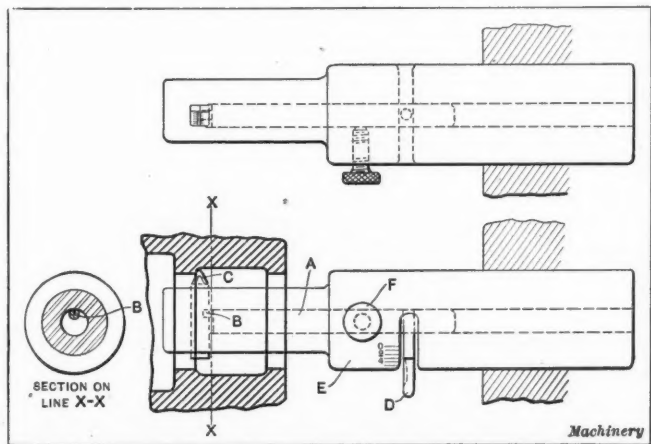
Handy Type of Boring-bar for performing Recessing Operations
